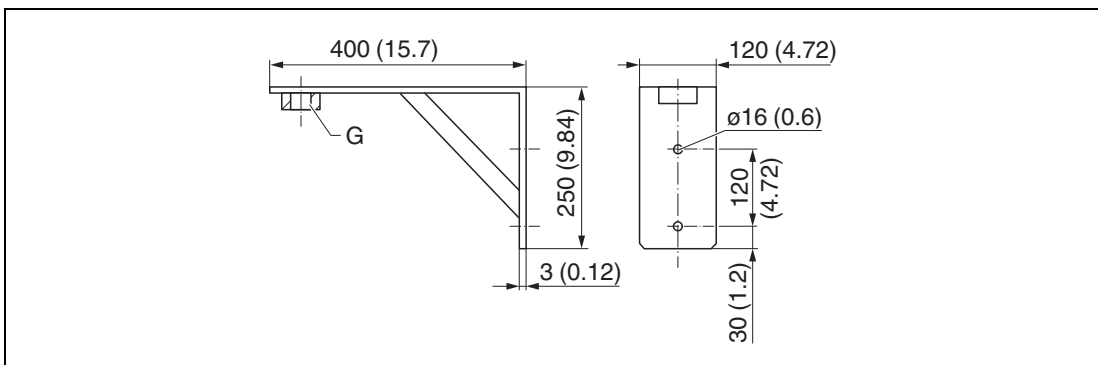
Dimensions of angle bracket, engineering unit: mm (inch)
